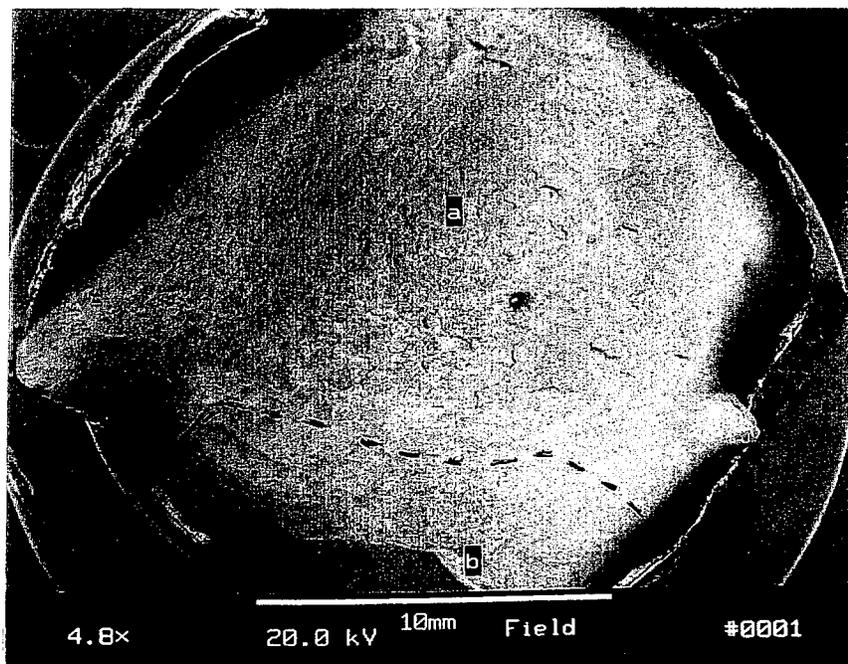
SEM View of the Crack Surface. [Mag. 4.8X]
